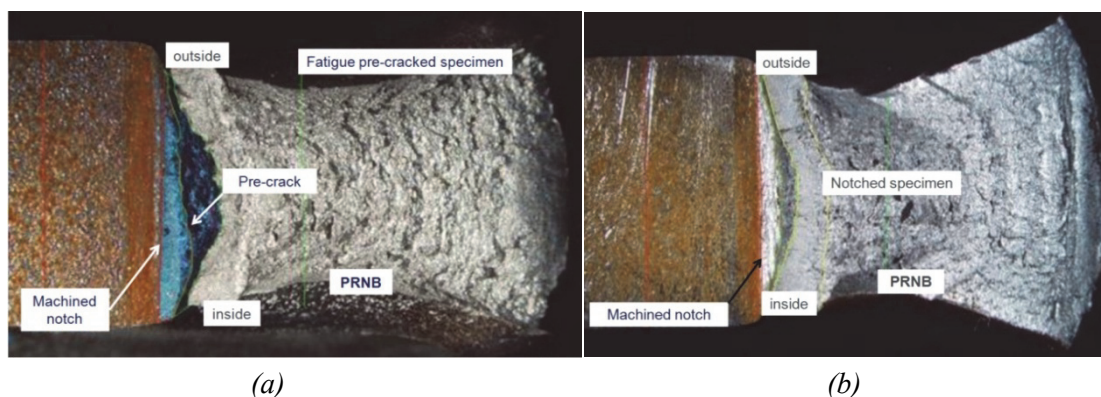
Fracture surfaces of fatigue pre-cracked (a) and notched (b) PRNB specimen [98]
